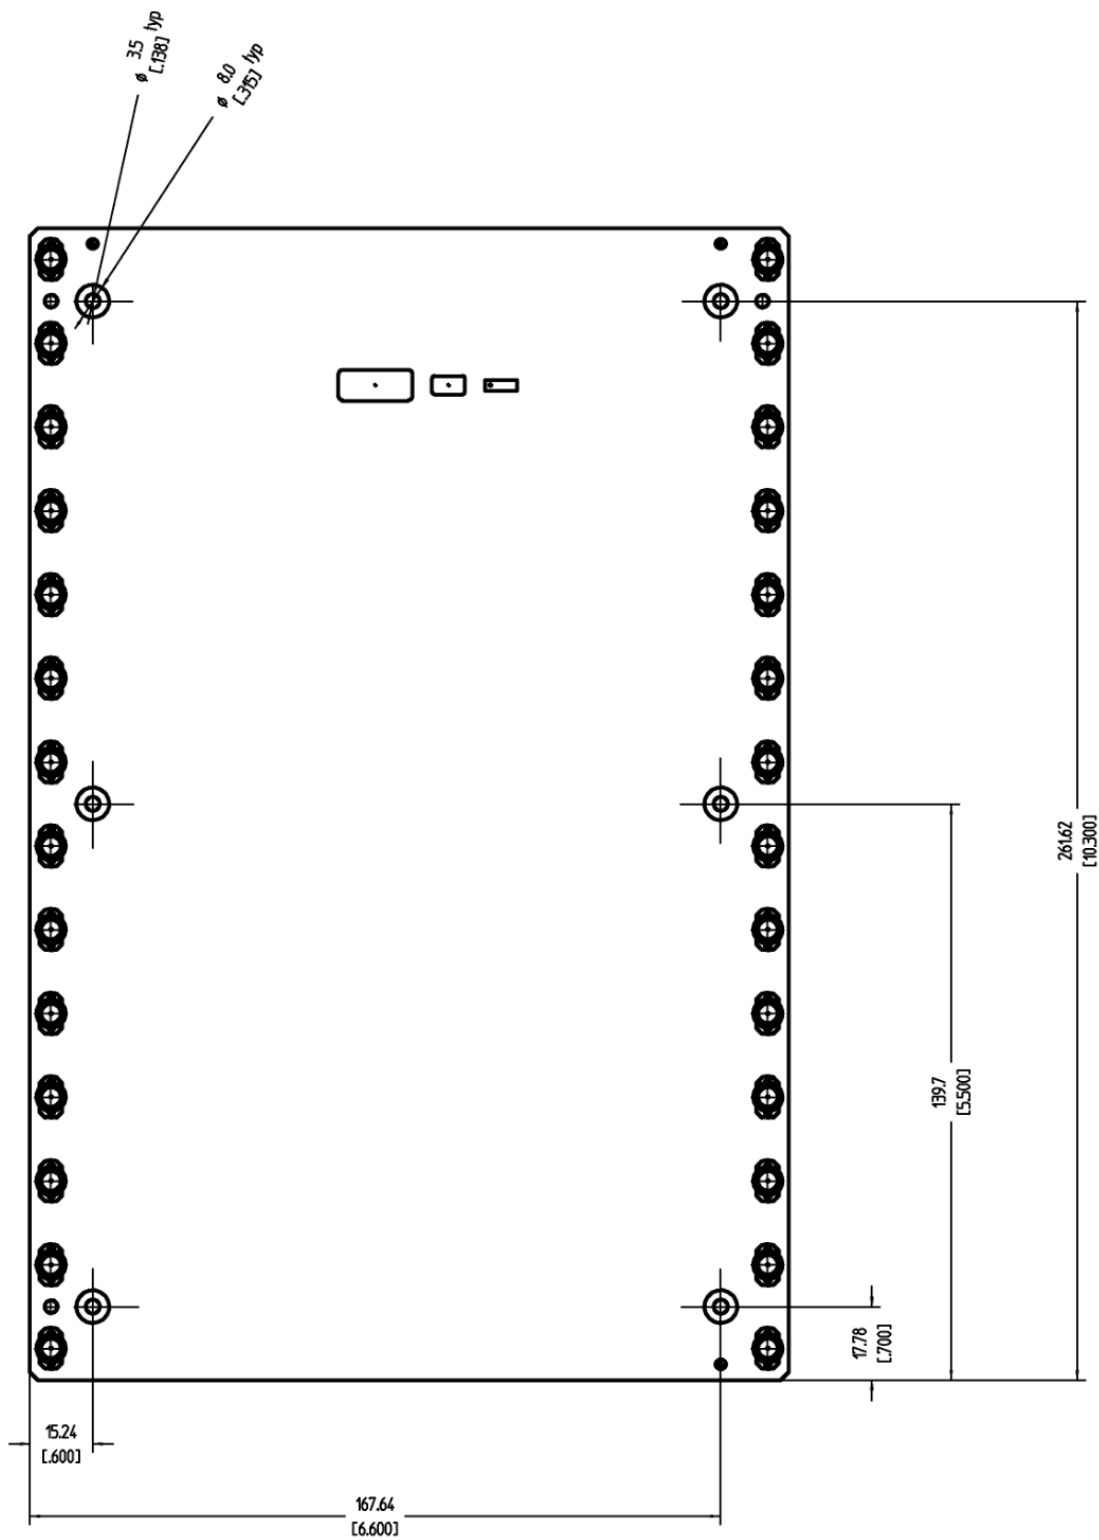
Mechanical drawing of M8049A-003 ISI channel boards with position of fastening holes.
